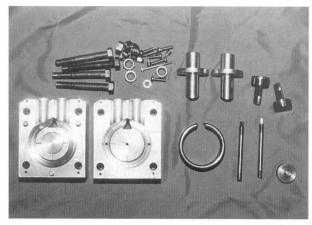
The photograph shows the main molding parts for the silicone blood chambers.
